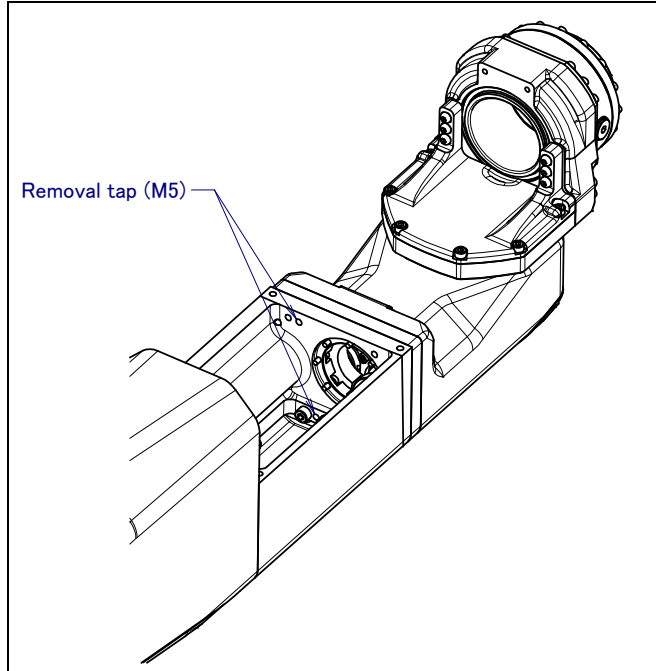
(b) Position of removal tap of the J5/J6-axis gearbox
